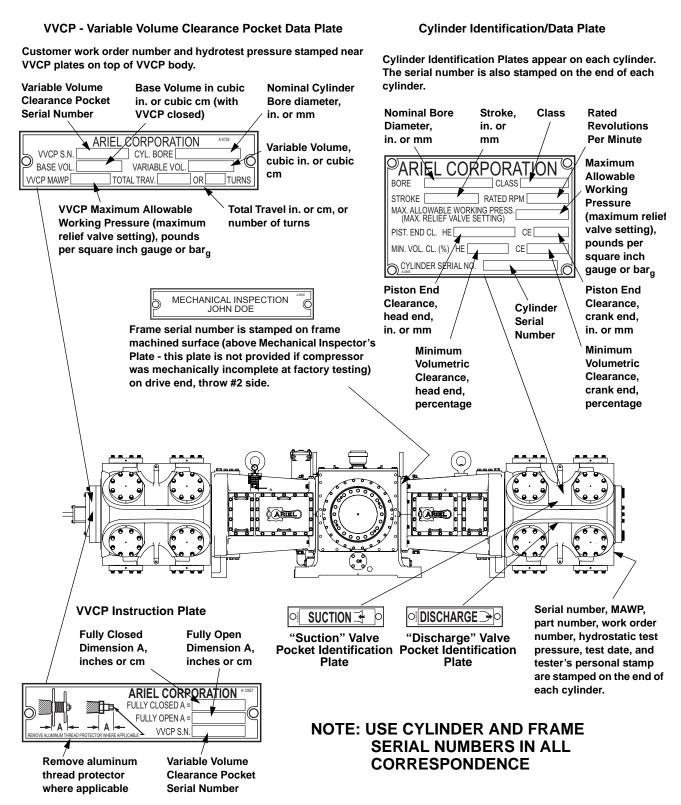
IDENTIFICATION PLATE LOCATIONS - COMPRESSOR DRIVE END VIEW
